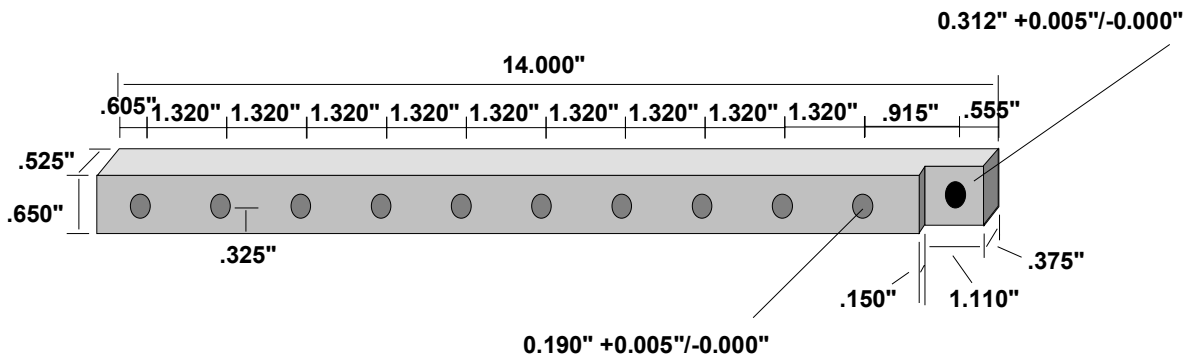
Mechanical Drawing of section 1 of Bus Bar Assembly
